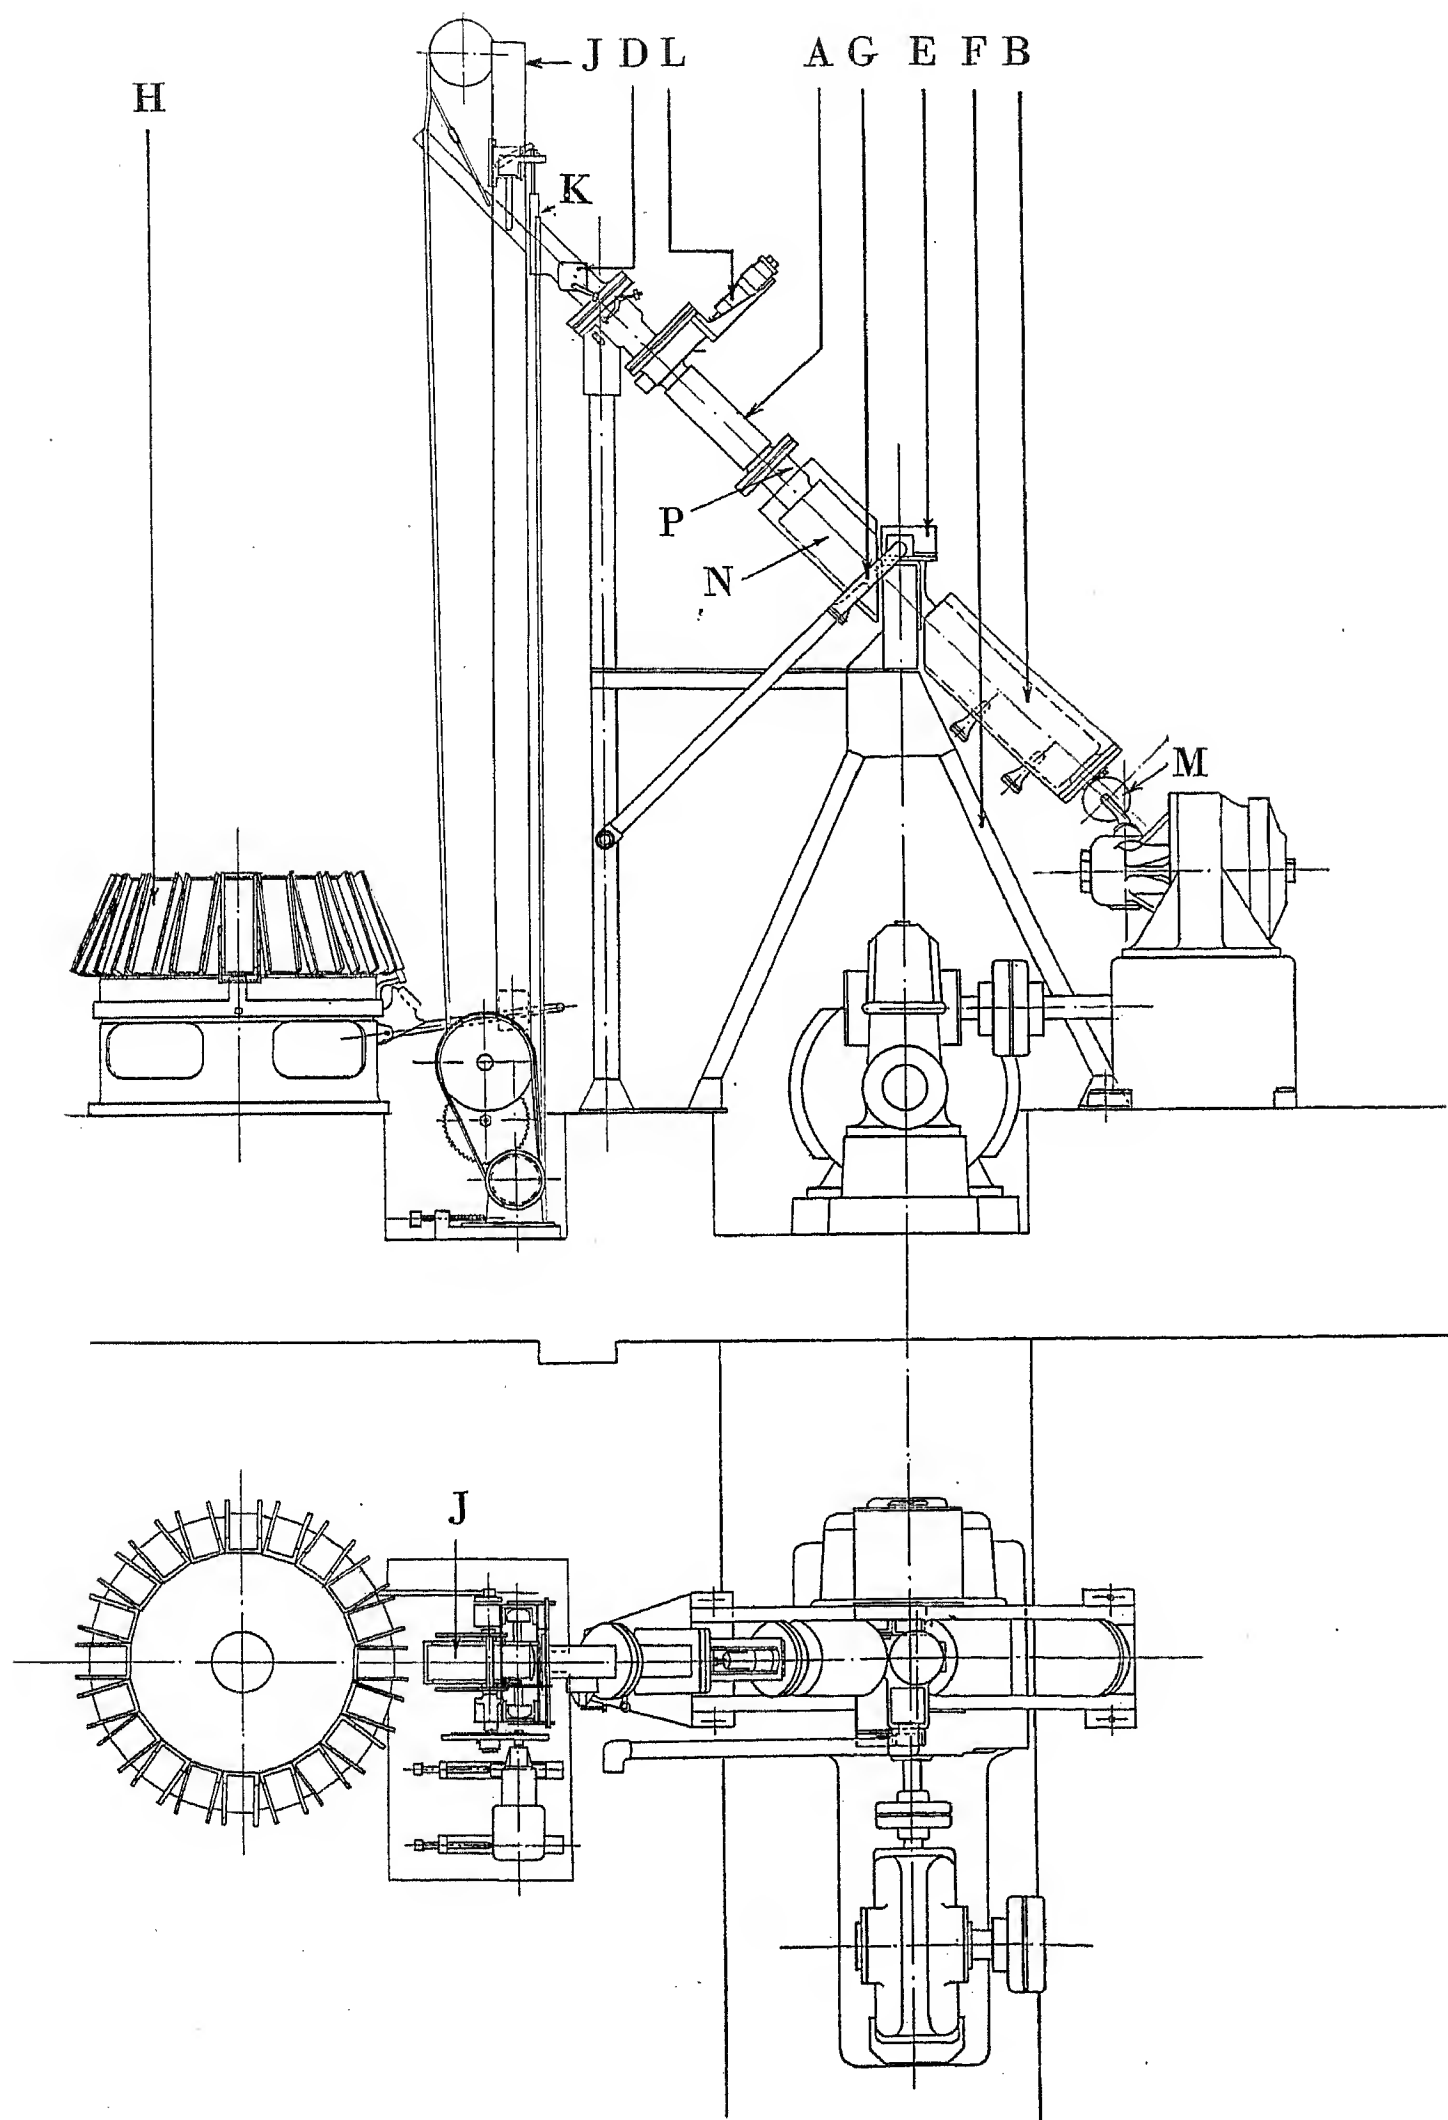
Arrangement of tubular lead furnace for Henley lead-extrusion machine.
